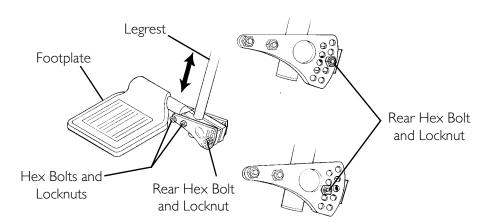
Adjusting Genius Legrests - Footplate Height/Footplate Angle
